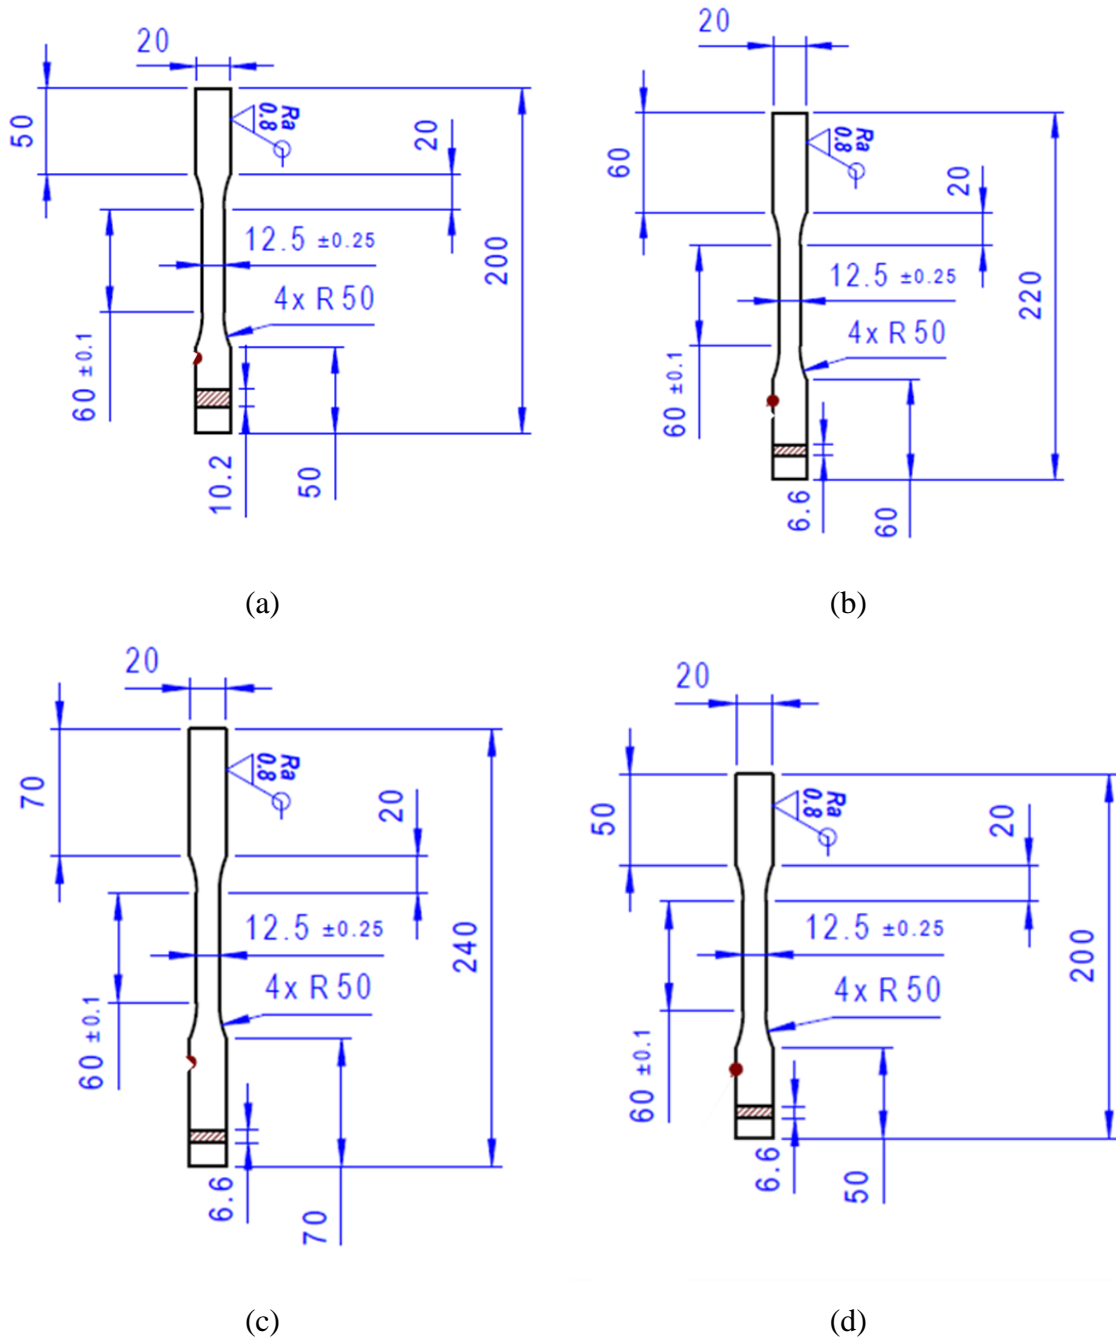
The technical drawing of the dogbone specimens of (a) 0-W, (b) 45-W, (c) 90-W, (d) 0-F.
